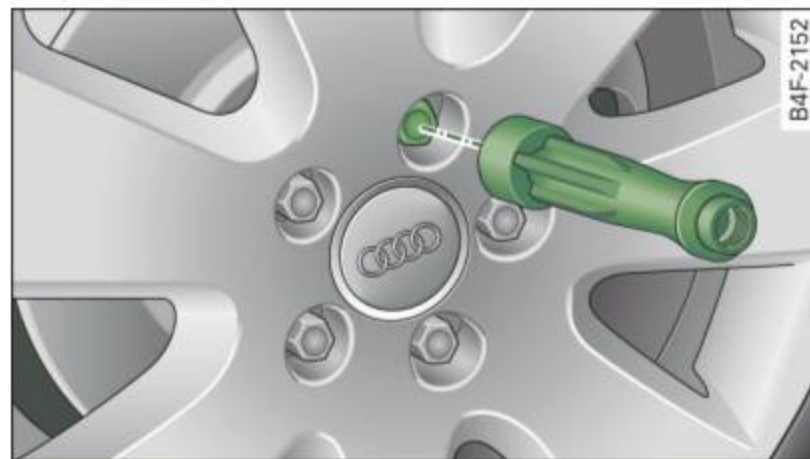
Wheel change: using the screwdriver handle (with the blade removed) to turn the bolts
